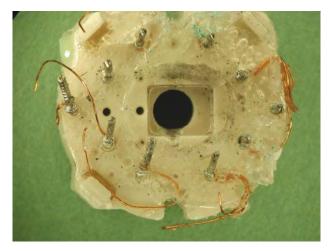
The underside of the transformer housing shows ten pins, each soldered to a copper wire. Wire routing does not appear controlled.
